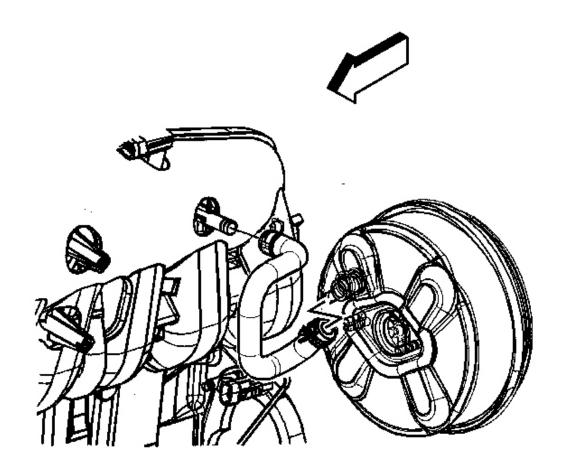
Identifying Brake Booster Vacuum Hose Courtesy of GENERAL MOTORS CORP.
